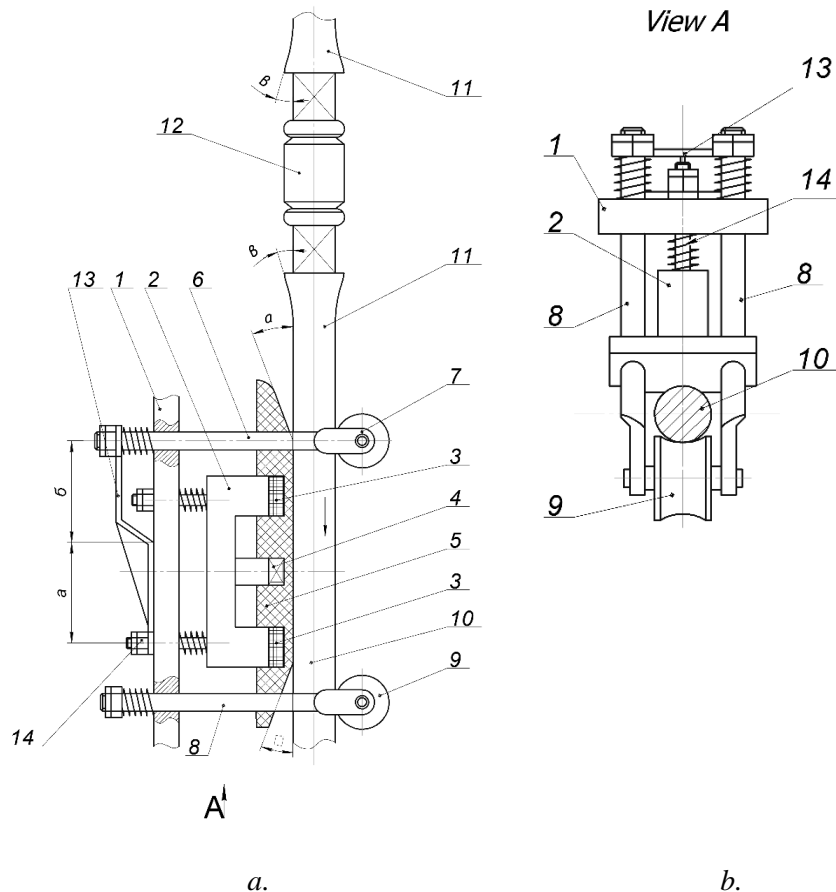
Rod magnetic flaw detector: a. - working position on the smooth part of the rod; b. - view A, bottom view.
